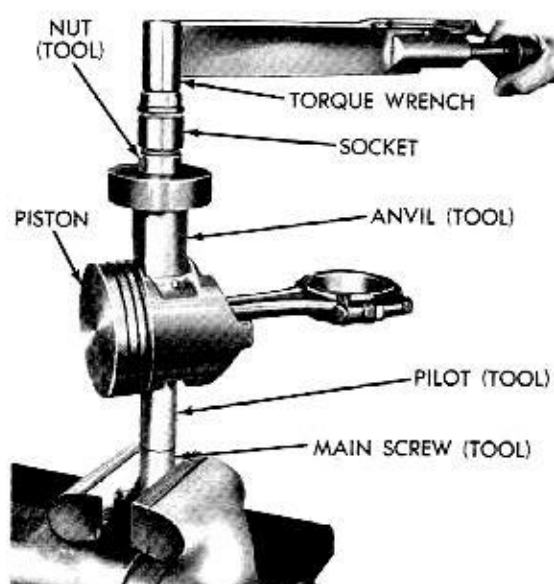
Testing Fit of Piston Pin In Connecting Rod
